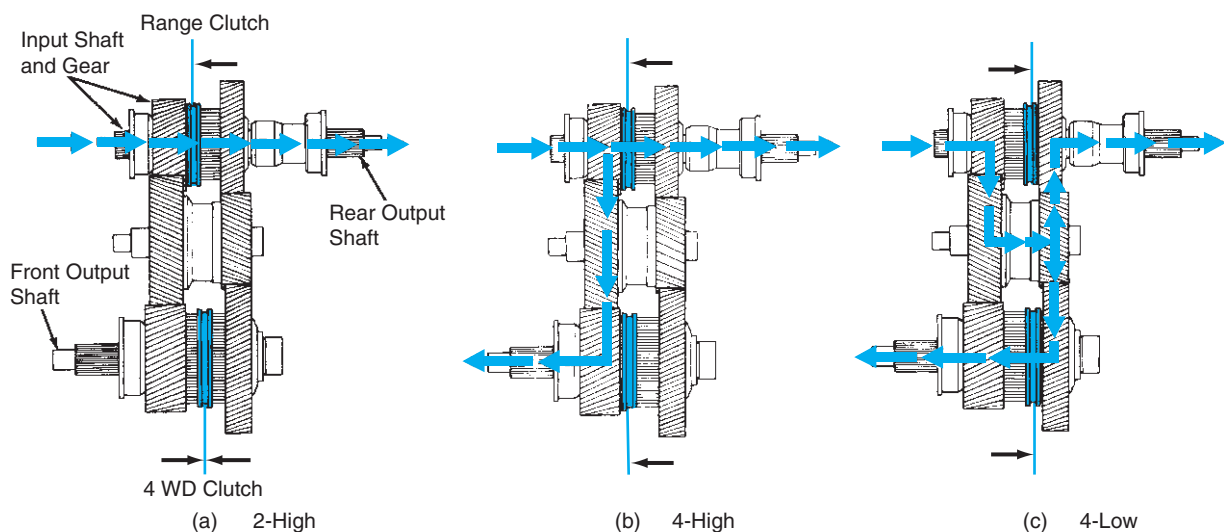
Power flow through a gear-drive transfer case in 2H (a), 4H (b), and 4L (c). Note the positions of the upper and lower shift collars (range and 4WD clutches). (Courtesy of Ford Motor Company)
